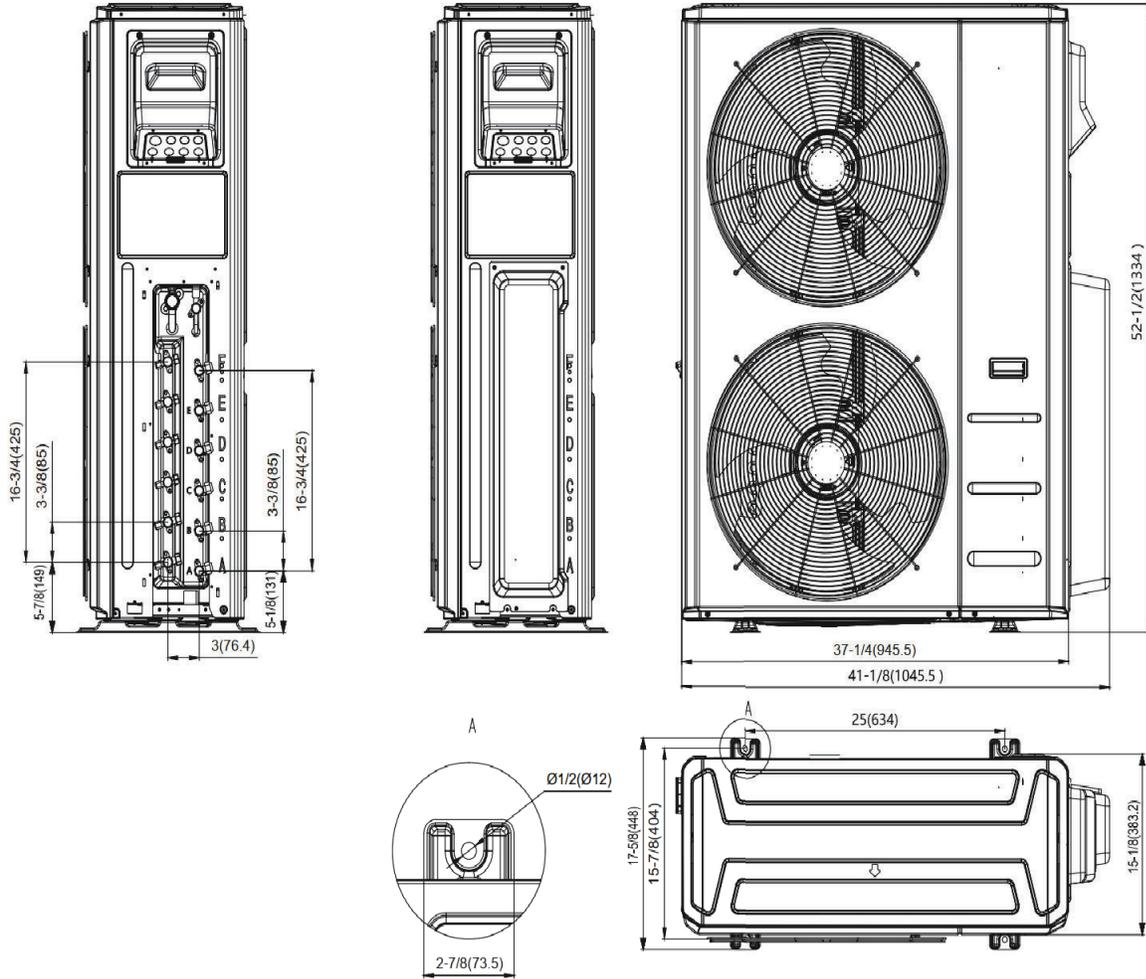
Outdoor Dimensions Sizes 48K, 55K
